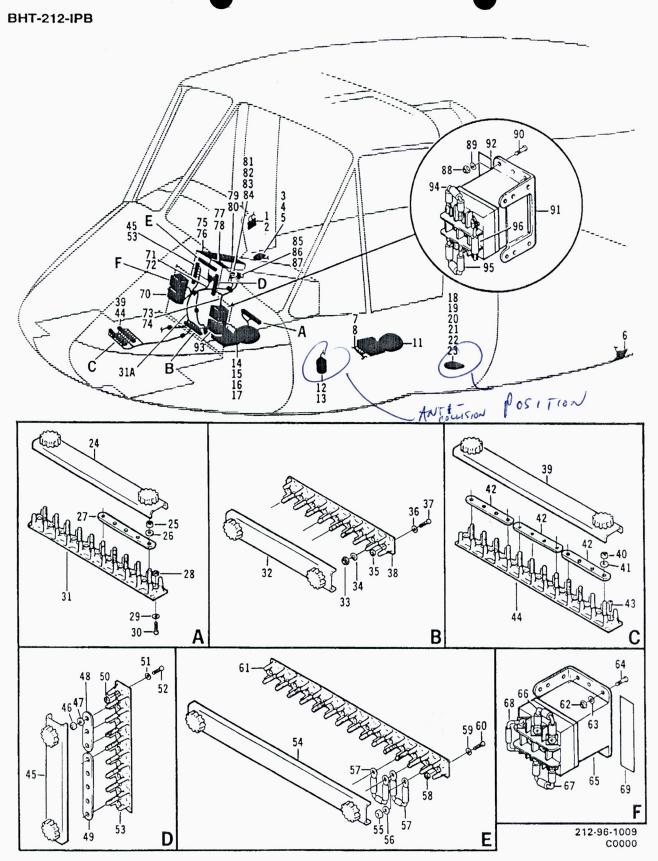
Electrical installation, forward section (30504 thur 30596, 30604 thur 30610)
